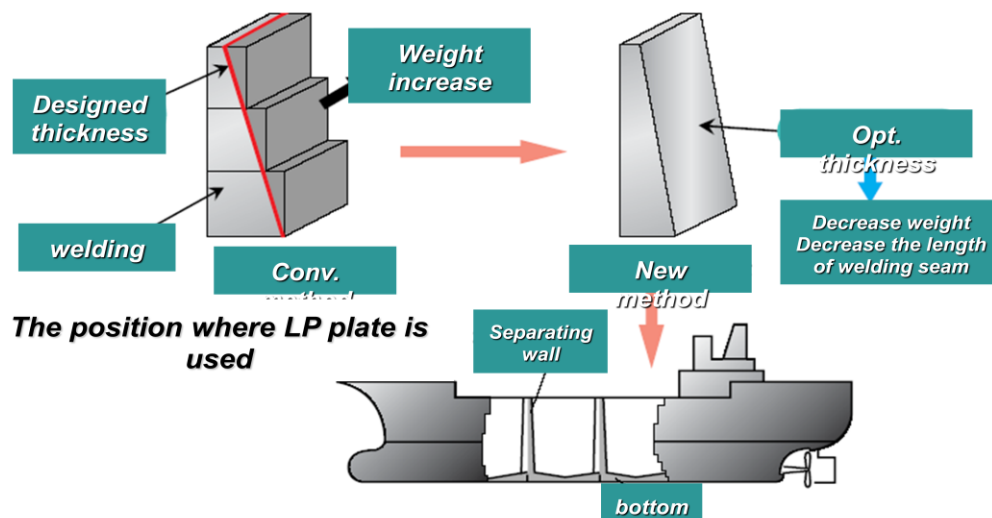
170000 t ship, using LP steel plate 2500 t; shorter welding line 700 m, steel saving 218 t
